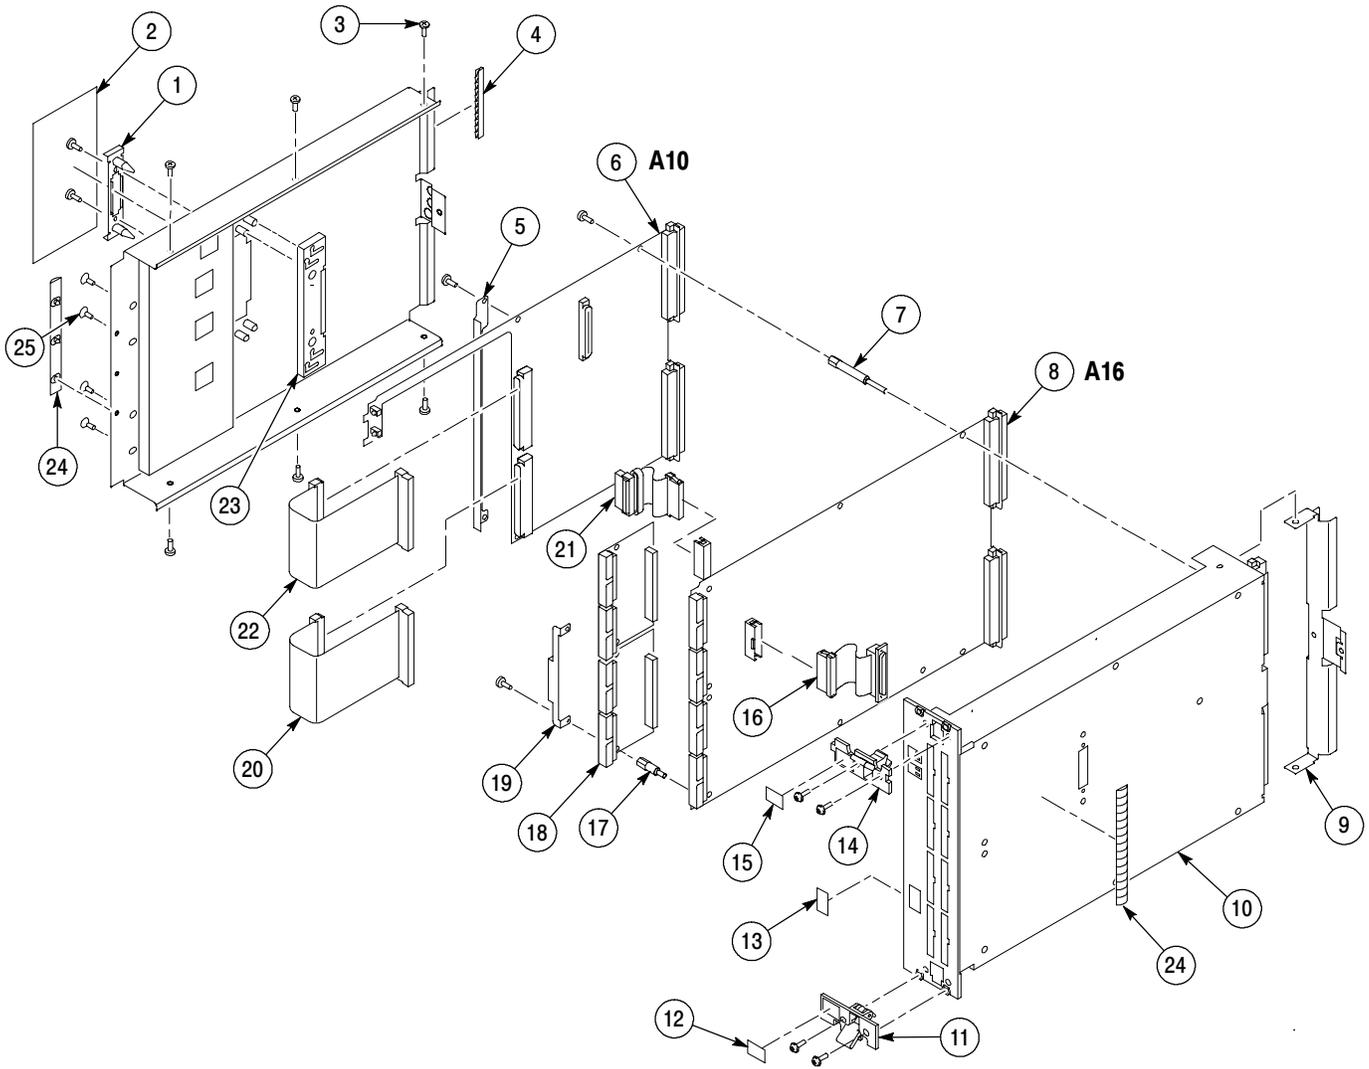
TLA700 Series Logic Analyzer Module exploded view
